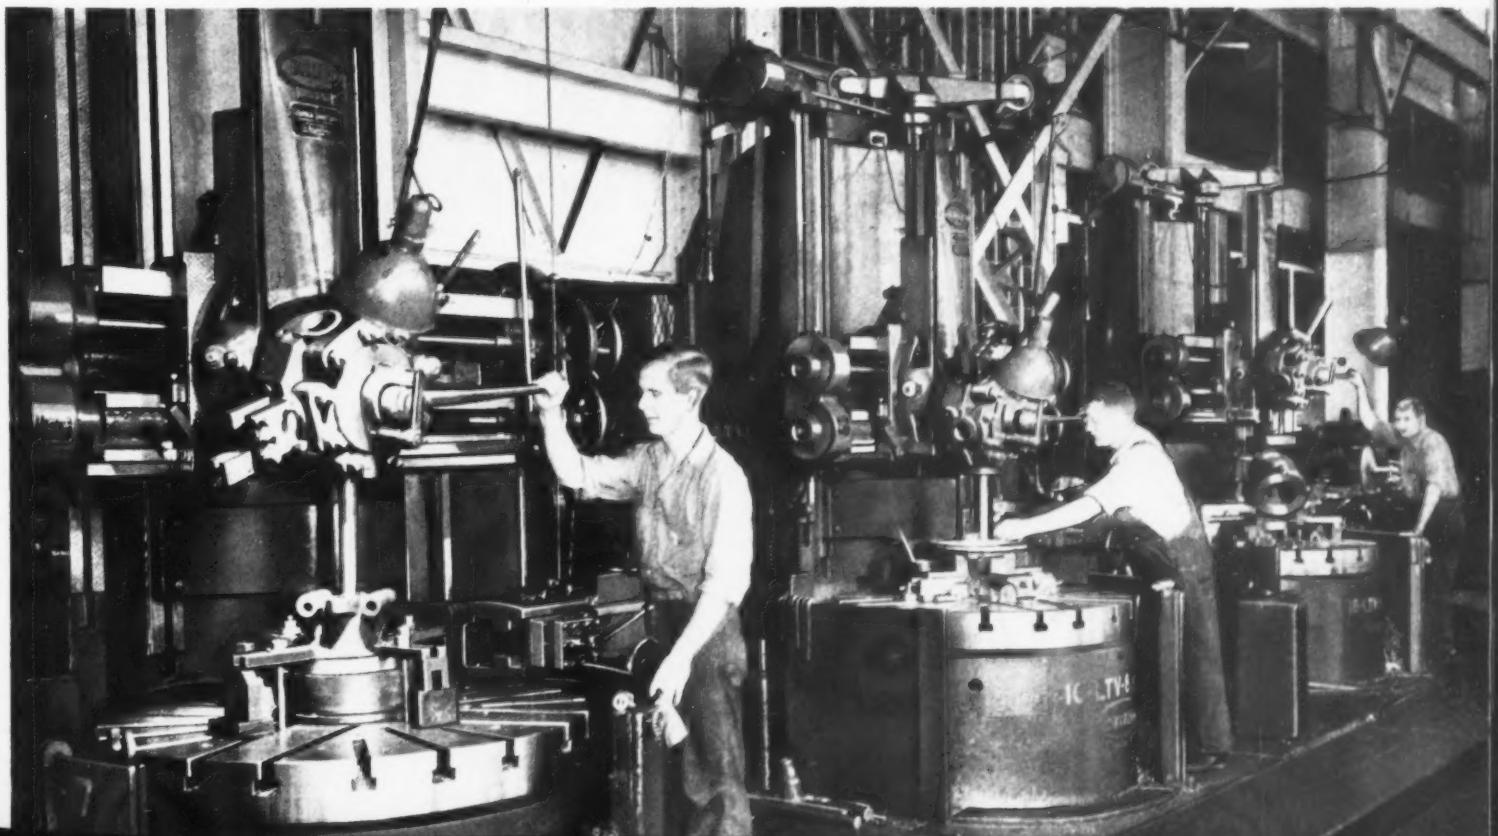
(Below) Battery of Vertical Turret Lathes Used for Finishing Castings for Valves and Similar Parts
